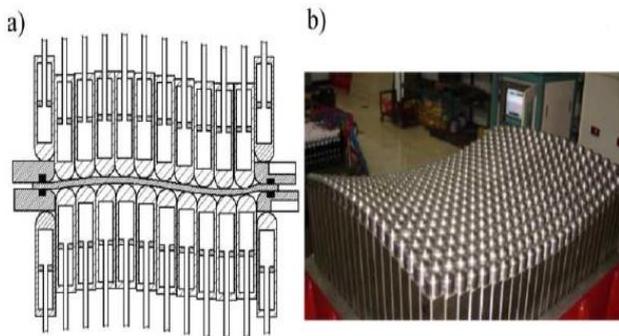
Reconfigurable surface tooling:(a) multi-punch stamping die; (b) multipoint forming press machine YAM8-315, [12]
